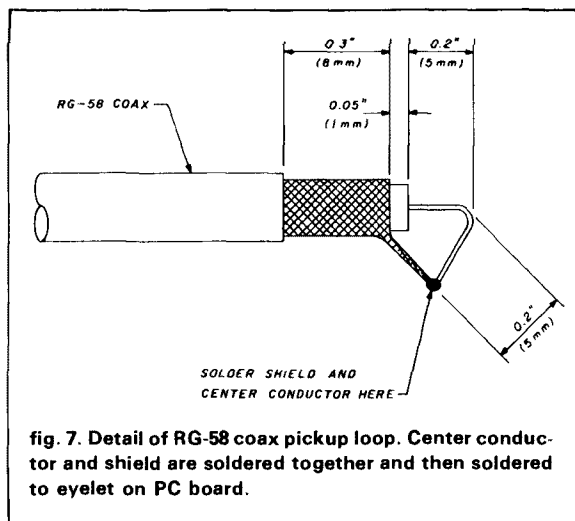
Detail of RG-58 coax pickup loop. Center conductor and shield are soldered together and then soldered to eyelet on PC board.
